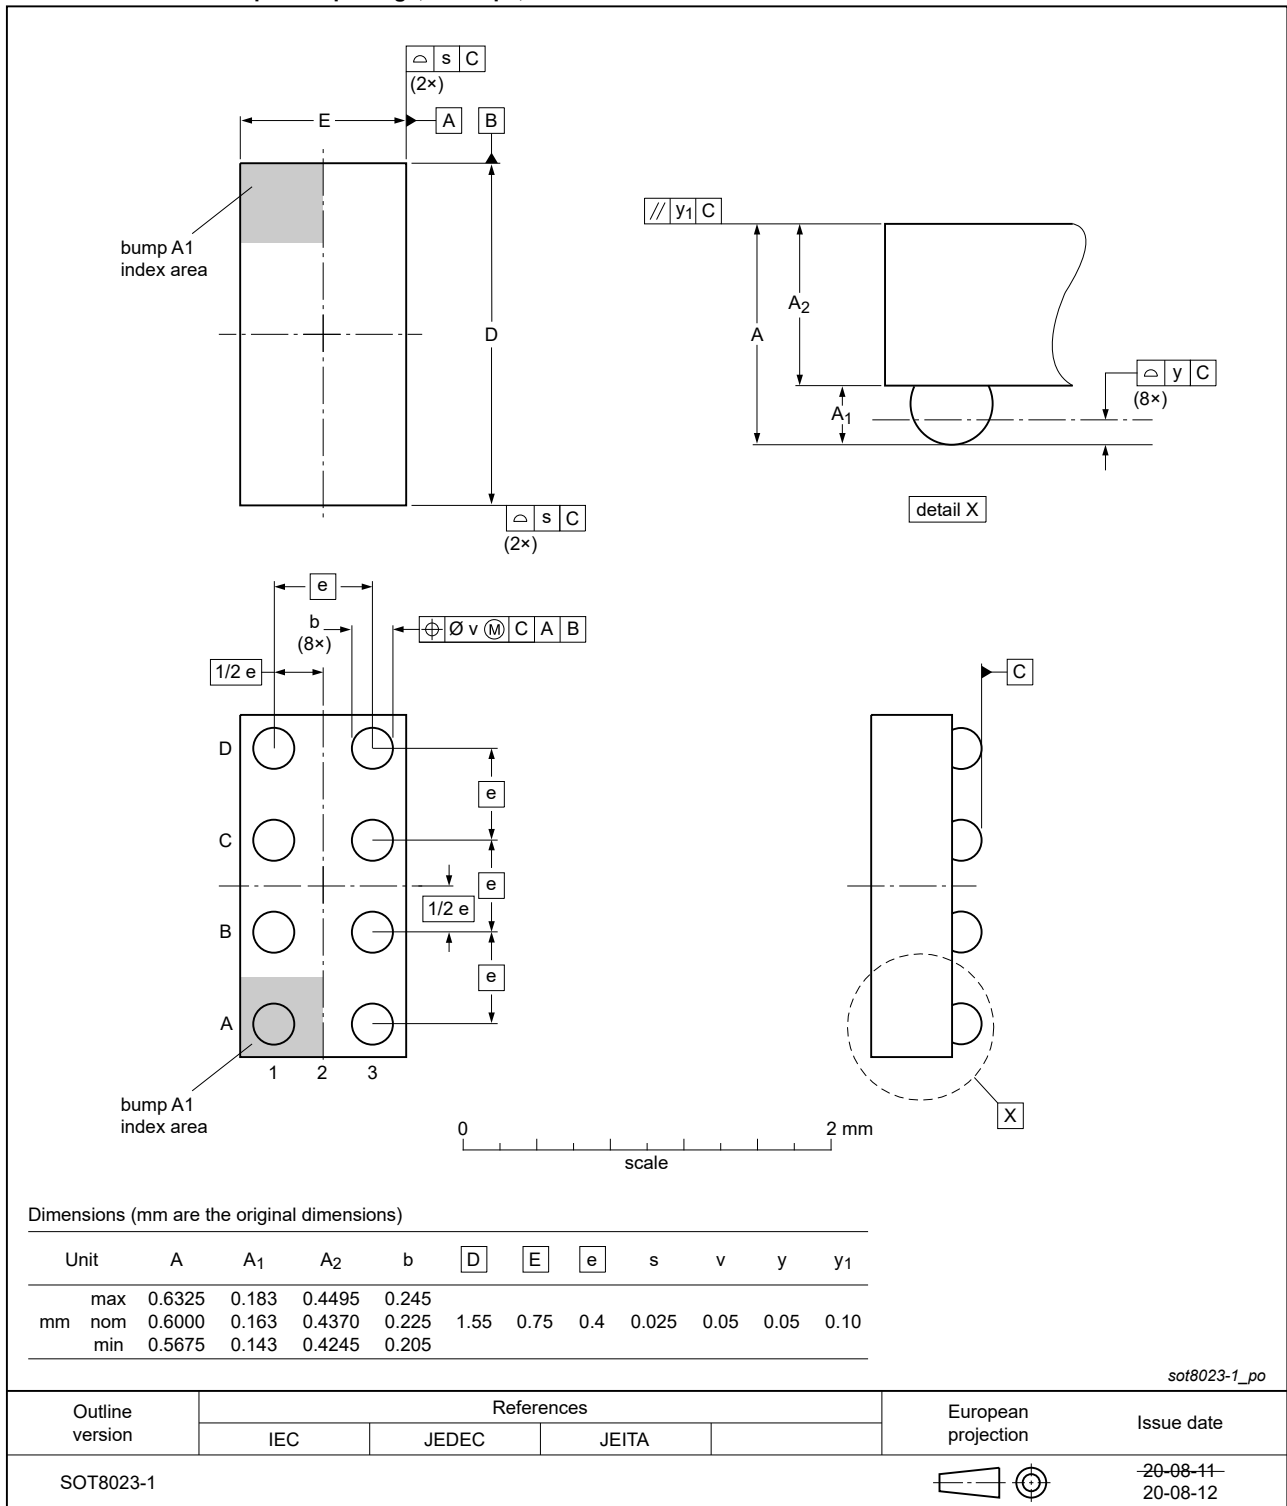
Package outline SOT8023-1 (WL CSP8)
